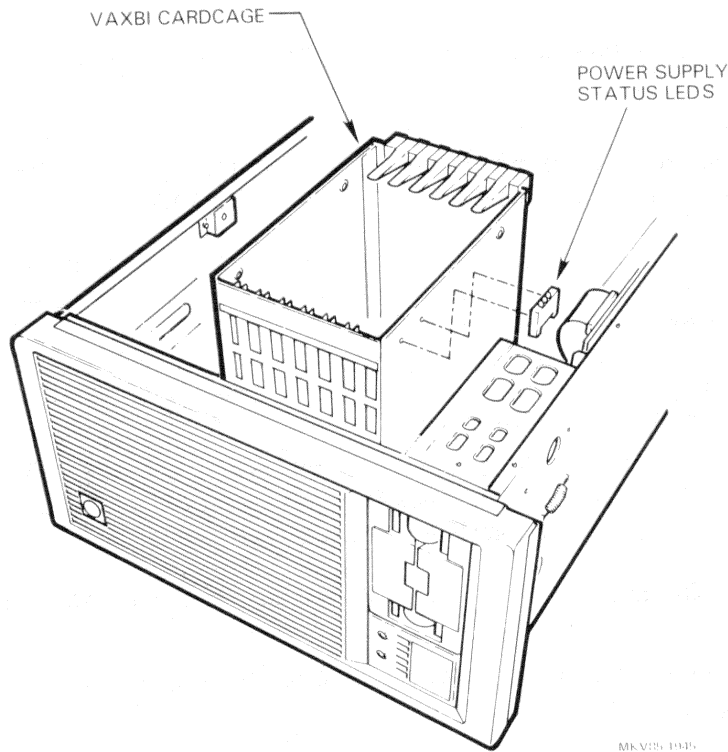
Single VAXBI Cardcage Removal/Replacement
